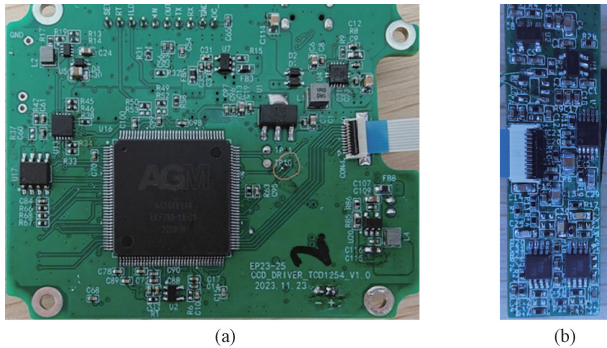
Photographs of circuit boards: (a) main control circuit board; (b) driver circuit board
